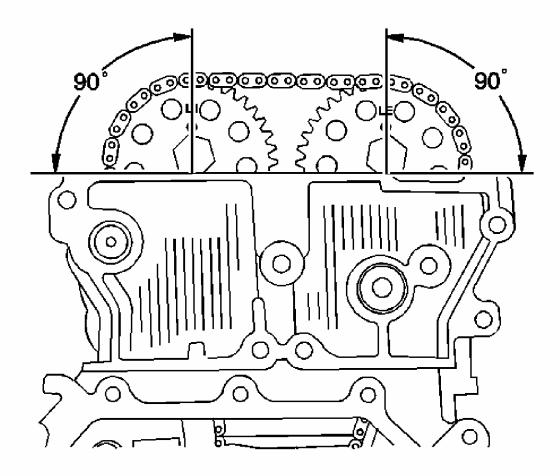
Ensuring Camshaft Sprocket Drive Pins Are At The Top Of Their Rotation
